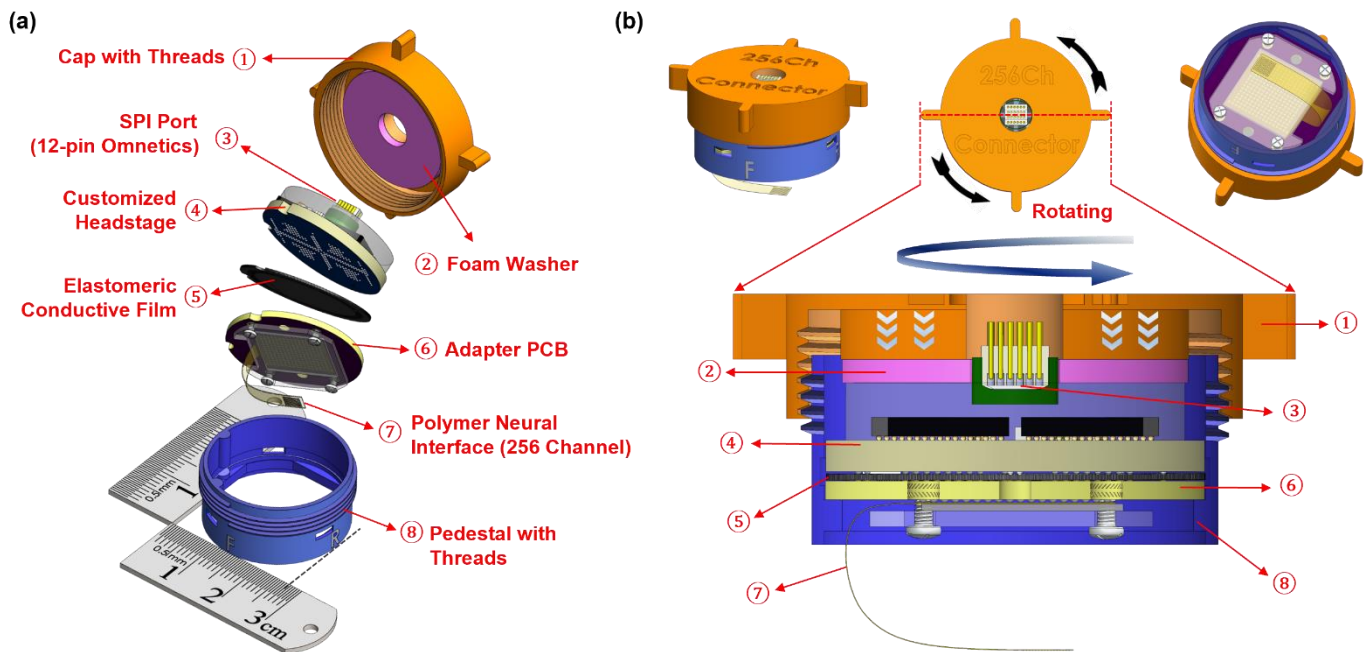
System design concept and mechanical integration strategy. (a) Exploded-view schematic illustrating the assembly components of the modular 256-channel pedestal connector. The system integrates a polymer neural interface with a customized headstage using an elastomeric interposer. (b) Fully assembled connector: side view (top left), top view (top middle), and bottom view (top right). The bottom panel provides a cross-sectional view of the threaded compression mechanism. The housing design converts manual torque into uniform axial pressure, facilitating stable electrical interlocking between the adapter PCB which is fixed on the internal pedestal step and headstage contacts without the need for precision pin alignment.
